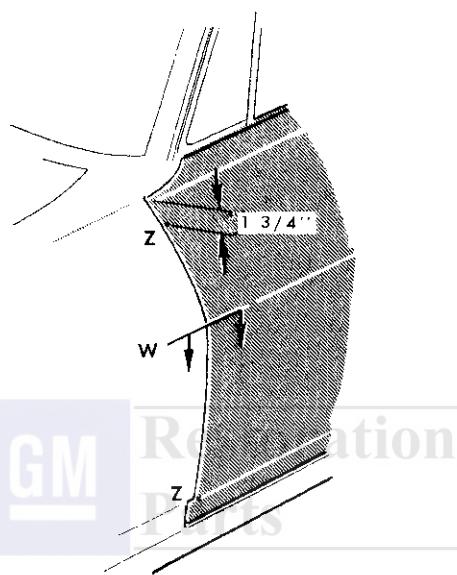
Specified Body Opening Clearance Tolerances - "X" Styles
